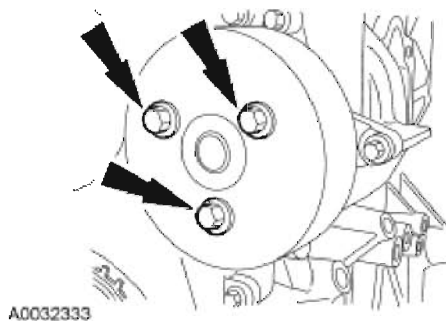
Locating Accessory Drive Belt Idler Pulley Bolt
